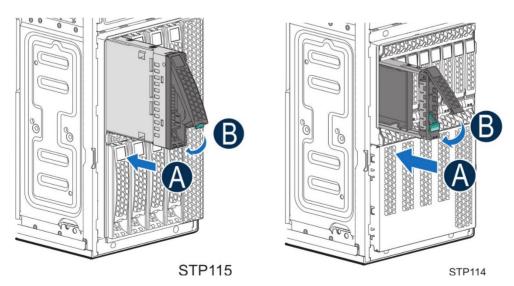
Hard Disk Drive Installation - Drive Carrier Insertion
